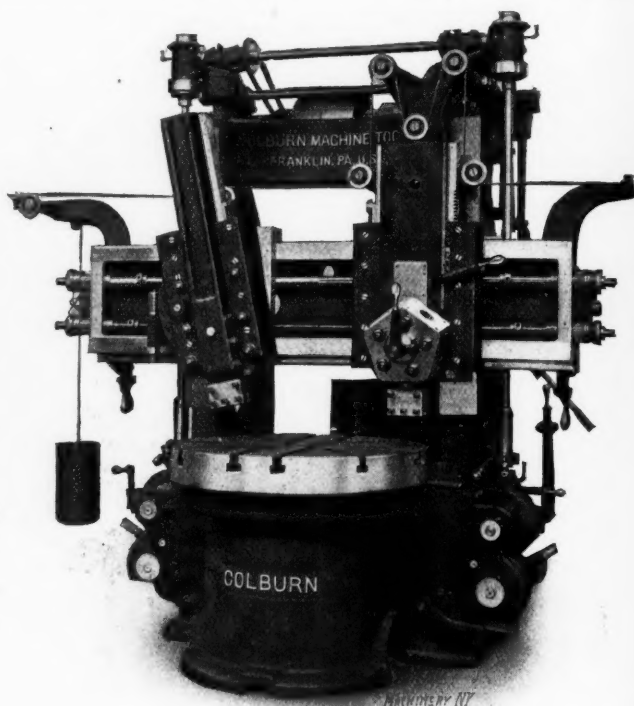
The 42-inch Machine, showing Alternative Form of Feed Box and Turret on the Right-hand Head
